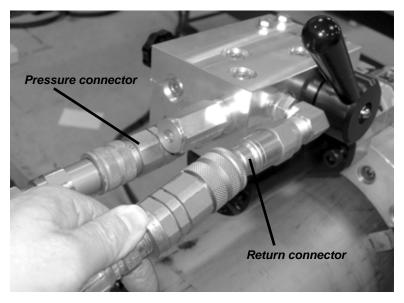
Connect the hydraulic hoses to the drive as shown.
